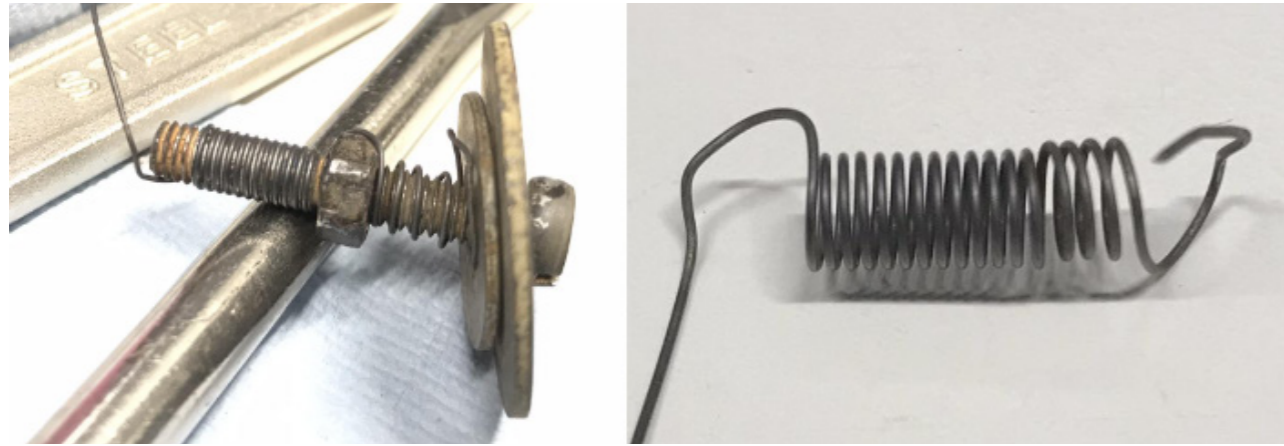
ACCIDENTAL PERMANENT DEFORMATION OF SMA SPIRAL SPRING DURING A REMOVAL PROCESS FROM THE MECHANICAL BOLT JIG
